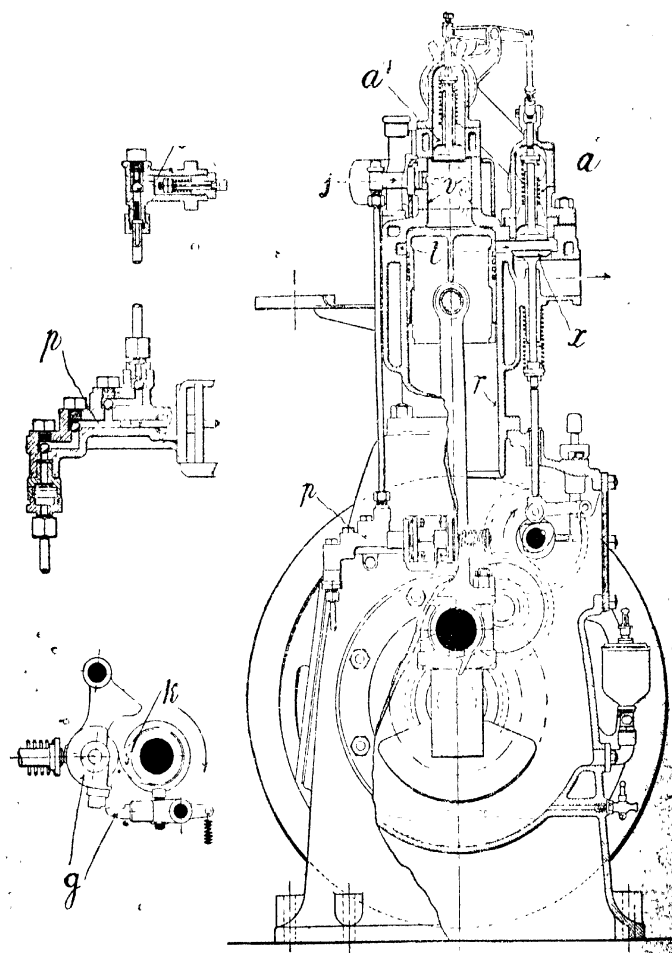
Sectional elevation and details of Westinghouse Cross engine, showing injection-vaporising process for heavy oils.
